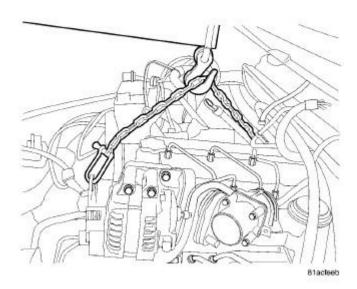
ENGINE LIFT Courtesy of CHRYSLER LLC
